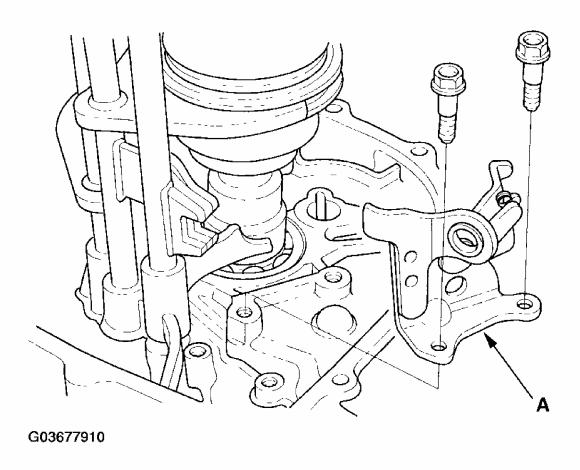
Removing Reverse Shift Fork Courtesy of AMERICAN HONDA MOTOR CO., INC.
